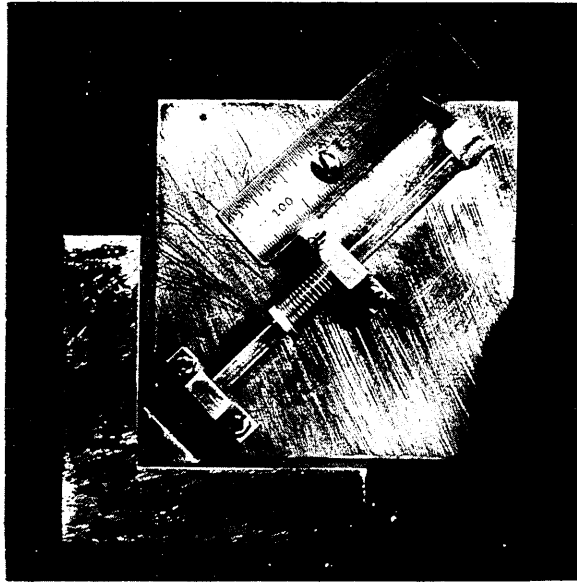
THROAT GAGE FOR MEASURING FILLET WELDS
